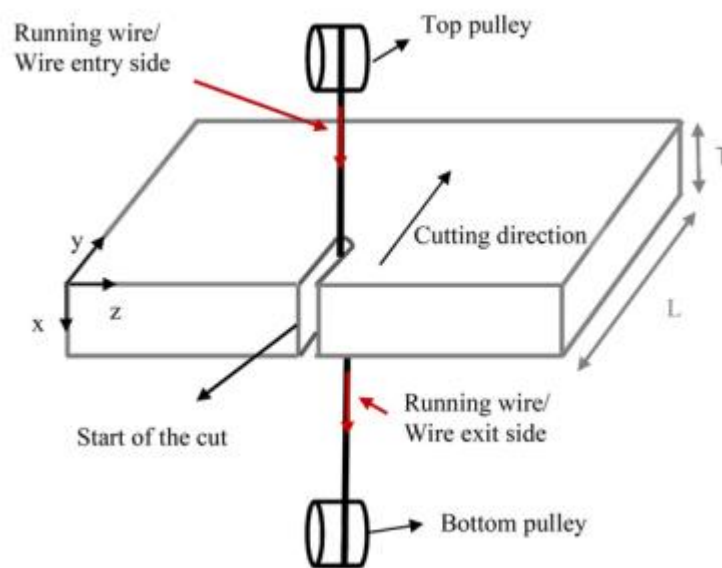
8: Schematic drawing of a component being cut by wire electro-discharge machining [30].
